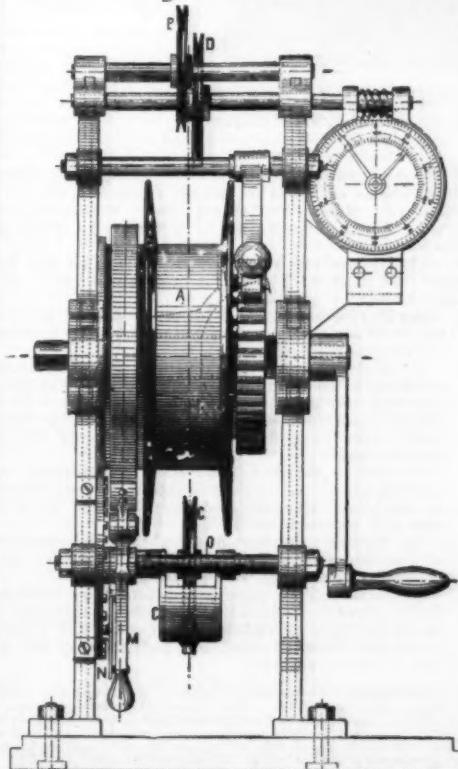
SIDE VIEW OF THE APPARATUS.
